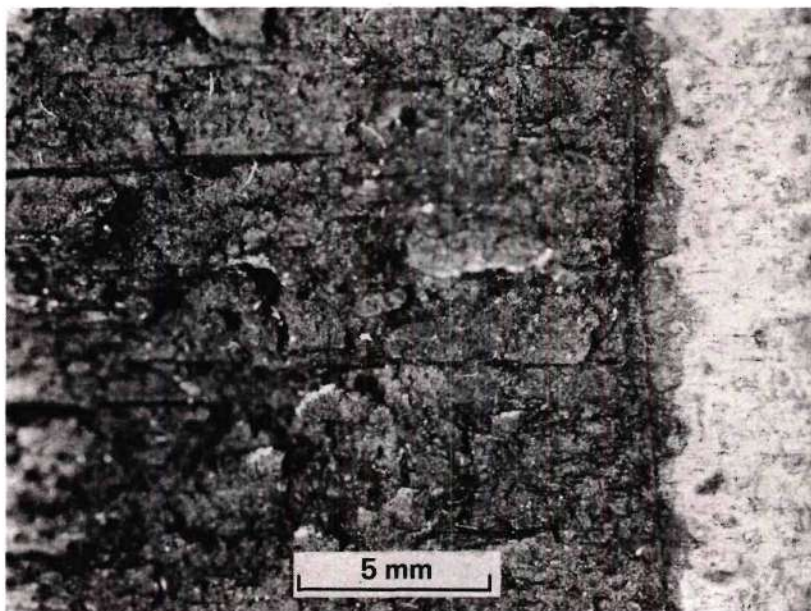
Closeup of CT Specimen SCC Fracture Surface.
